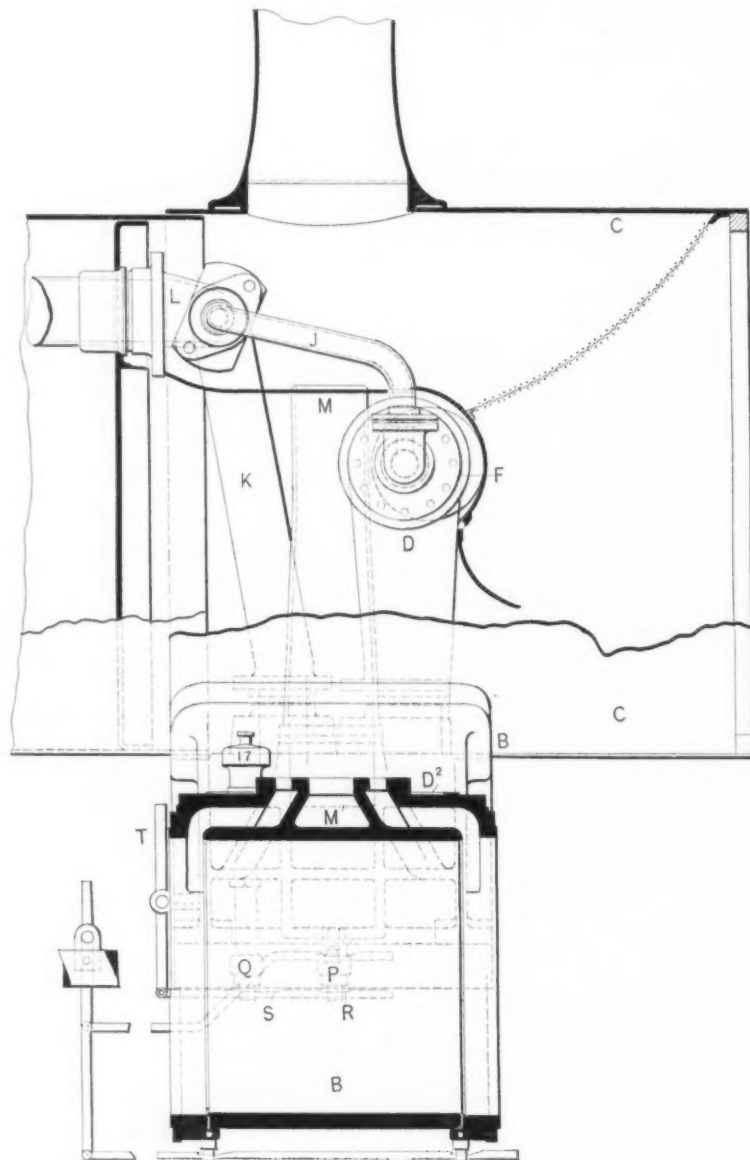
Longitudinal Section through Low-Pressure Cylinder.
